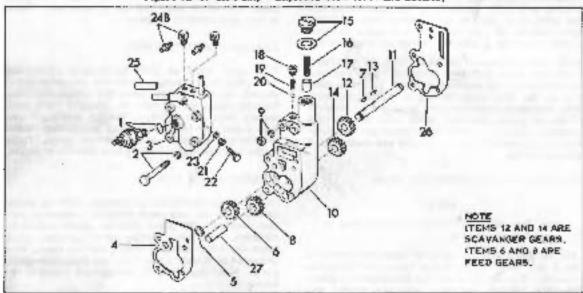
A Dil Pump - Exploded View (1988 and Later)
